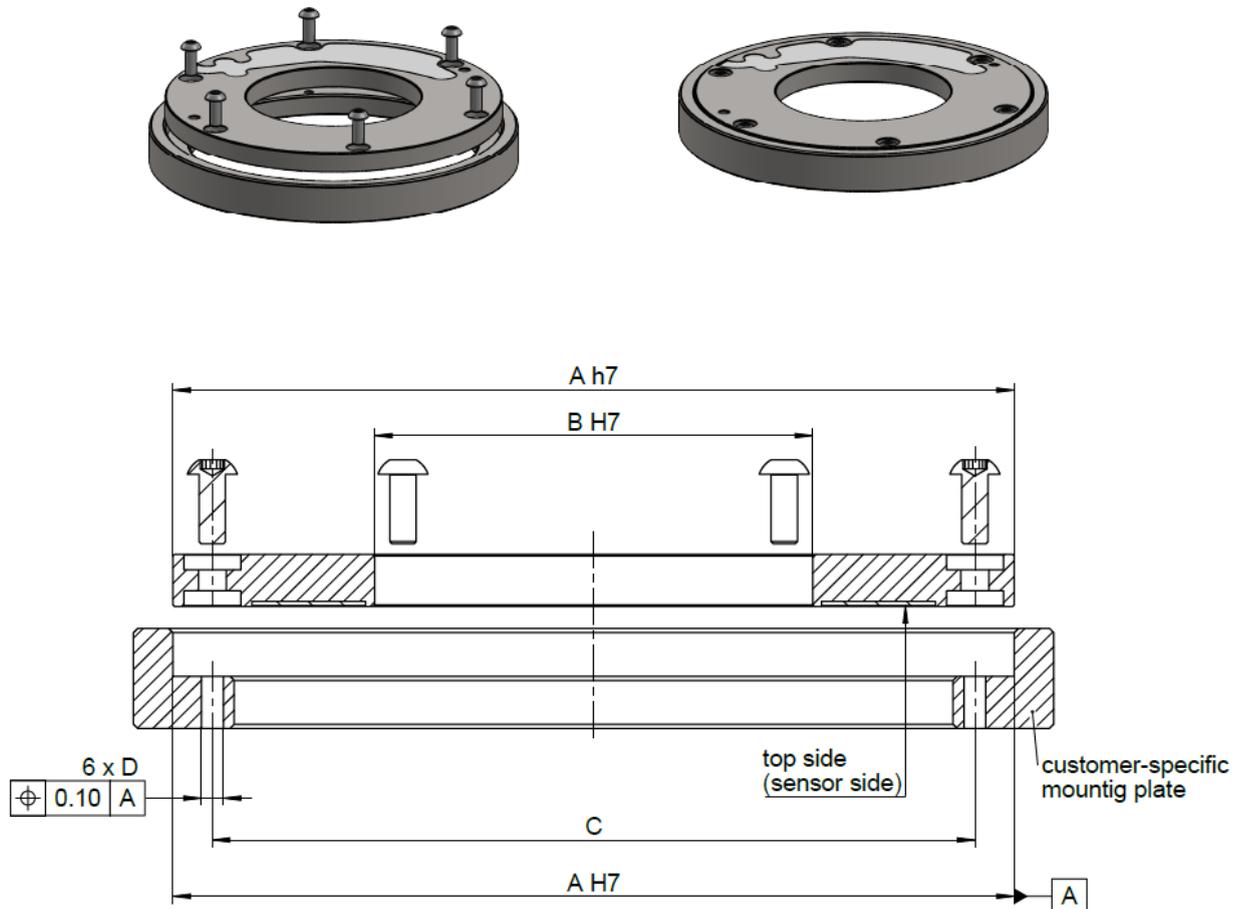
Stator (GAS) mounting using OD sliding fit
